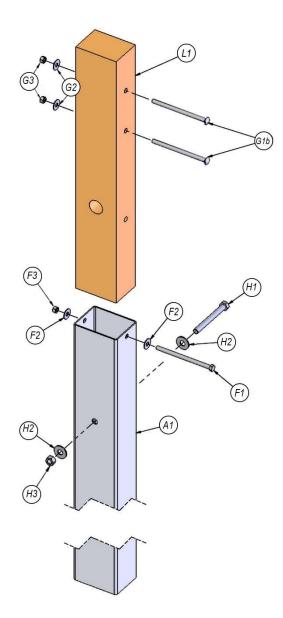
Post 1 – Exploded View (Rail Not Shown)
